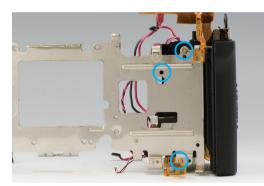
Position of Right Side Cover Ass'y Screws (Back)
